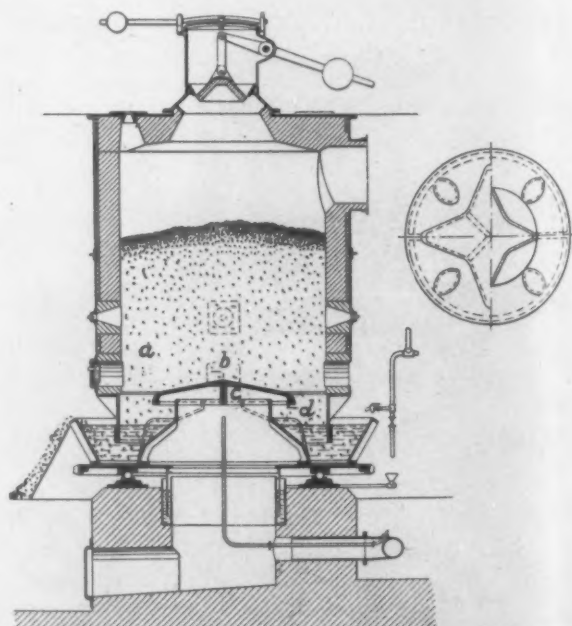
Hilger Gas Producer with Rotating Grate.
